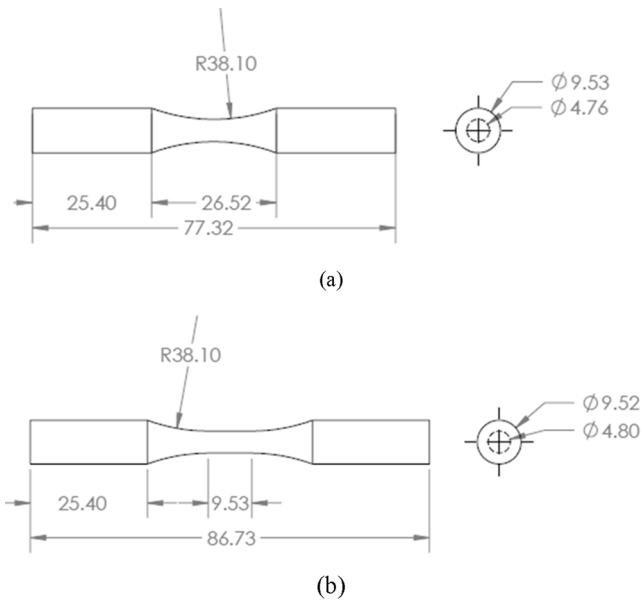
The geometry and dimensions of specimens used for (a) rotating-bending test based on ISO Standard 1143 [21] and (b) axial test based on ASTM Standard E-466 [22]. All the dimensions are in mm.
